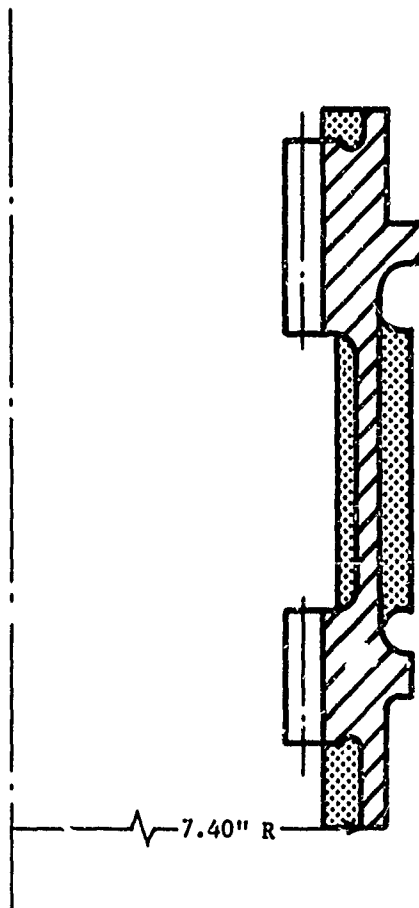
UH-1D Ring-Gear Casing With Center and End Section Modifications.
